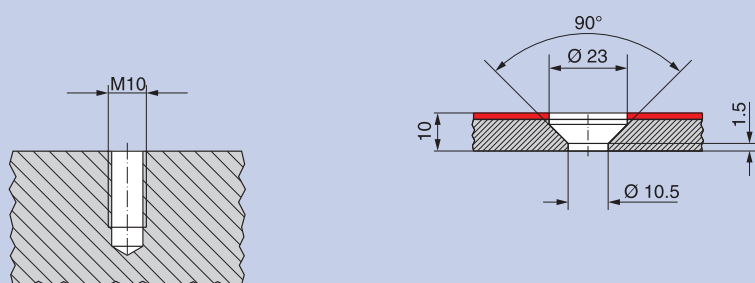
Fastening deva.bm® sliding strips with hexagon socket countersunk head screws
